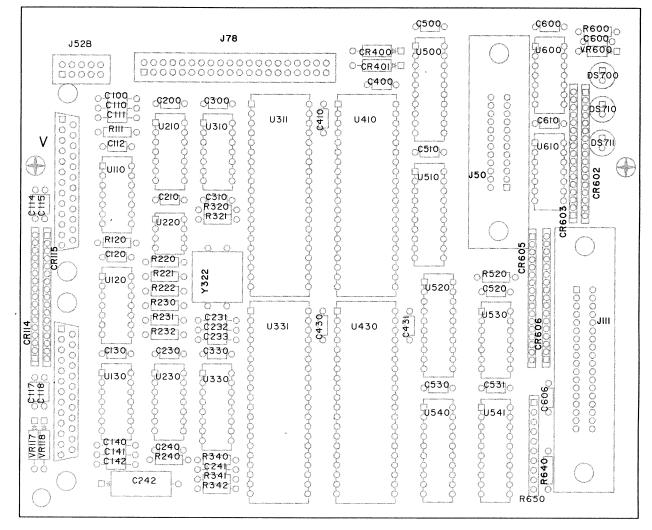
A12-Rear Panel Circuit Board Assembly
